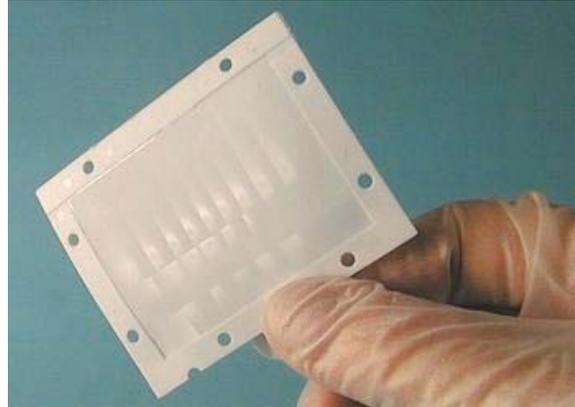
Injection moulded lenslet arrays in polyethylene.
